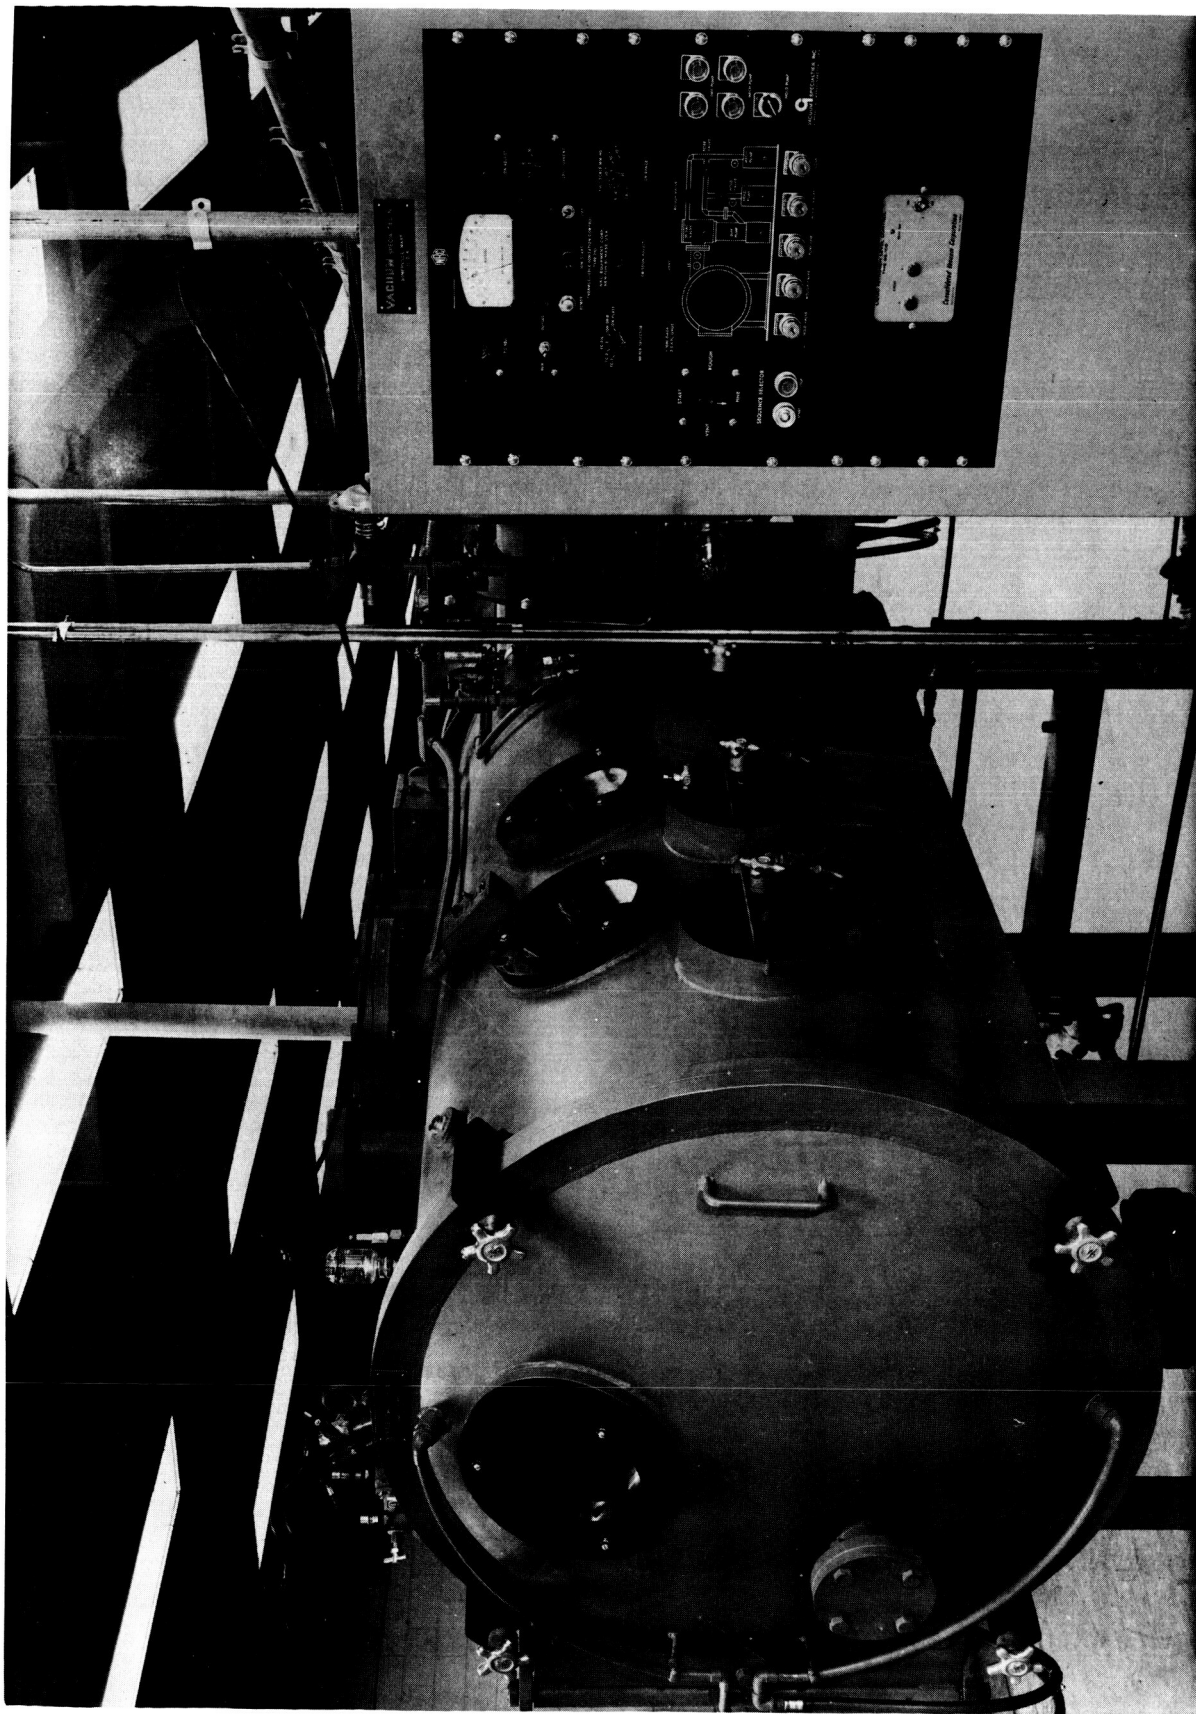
Vacuum-Purge, Controlled Atmosphere Welding Chamber, 3 Feet in Diameter x 6 Feet Long, Equipped with a 10-Inch Diameter Oil Diffusion Pump Capable of Attaining a Pumping Speed of 4100 l/sec at a Pressure of 1×10^{-5} Torr. (C63120630)
